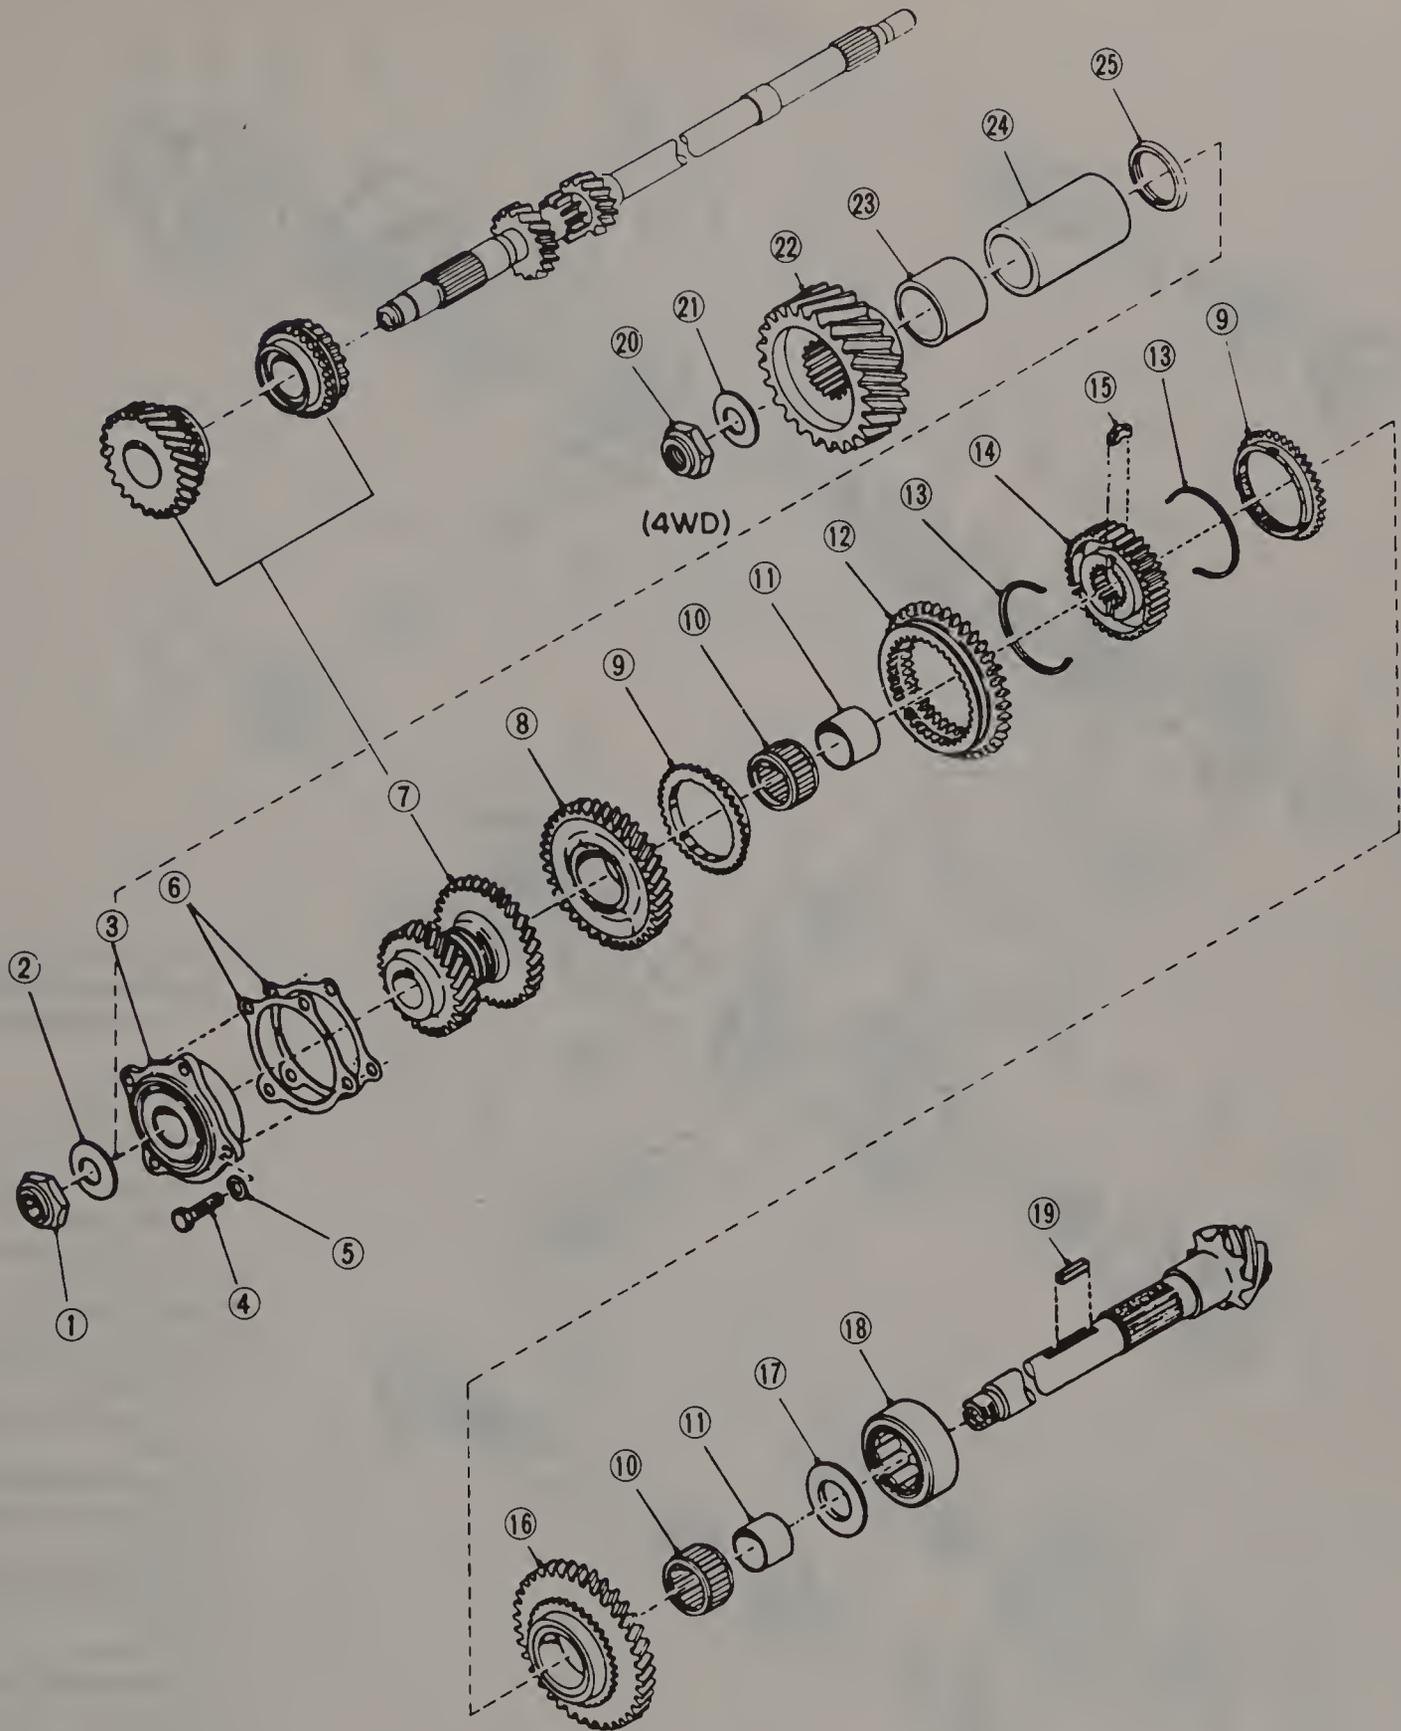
Drive pinion components (4-speed and 4WD) – exploded view
